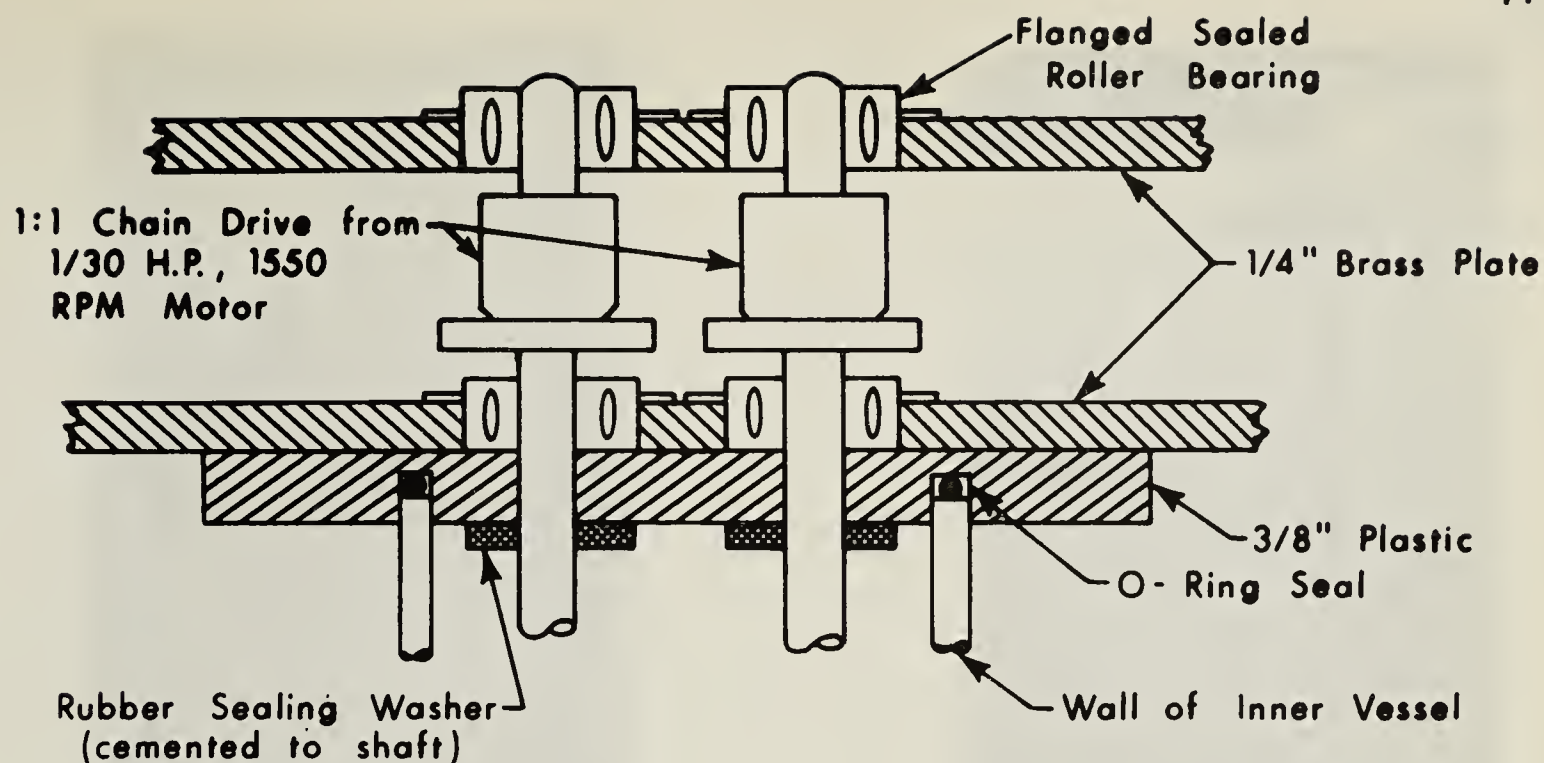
Schematic Diagram of Bearings, Seal & Drive
